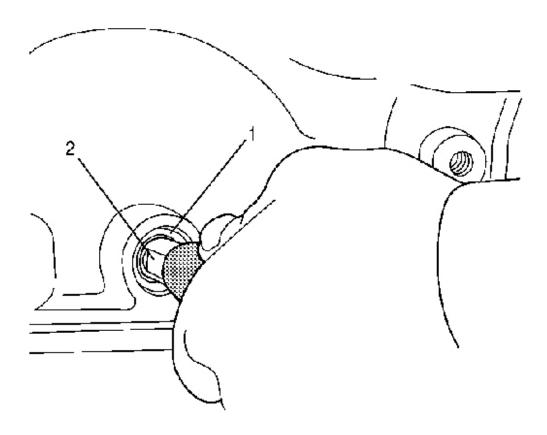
Sliding Seal Remover Tool Over Selector Shaft Courtesy of GENERAL MOTORS CORP.
